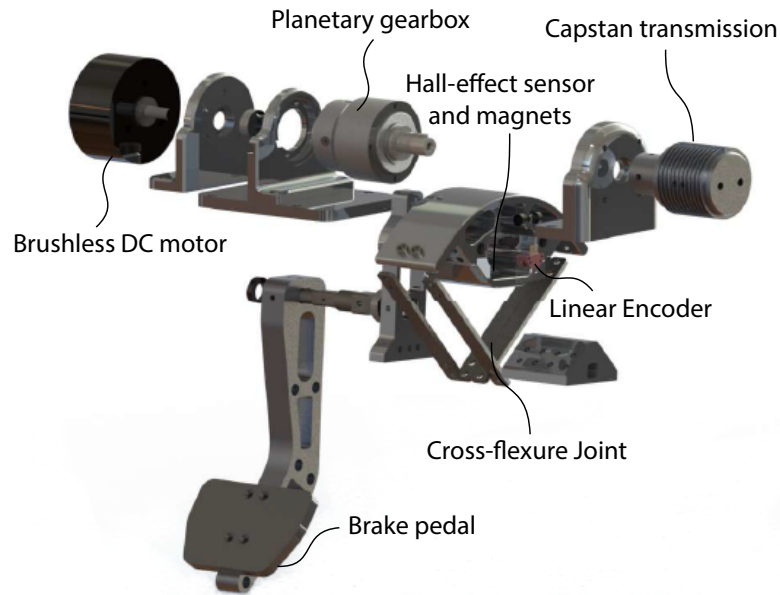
Mechatronic design of the SEA brake pedal and the dynamometer
